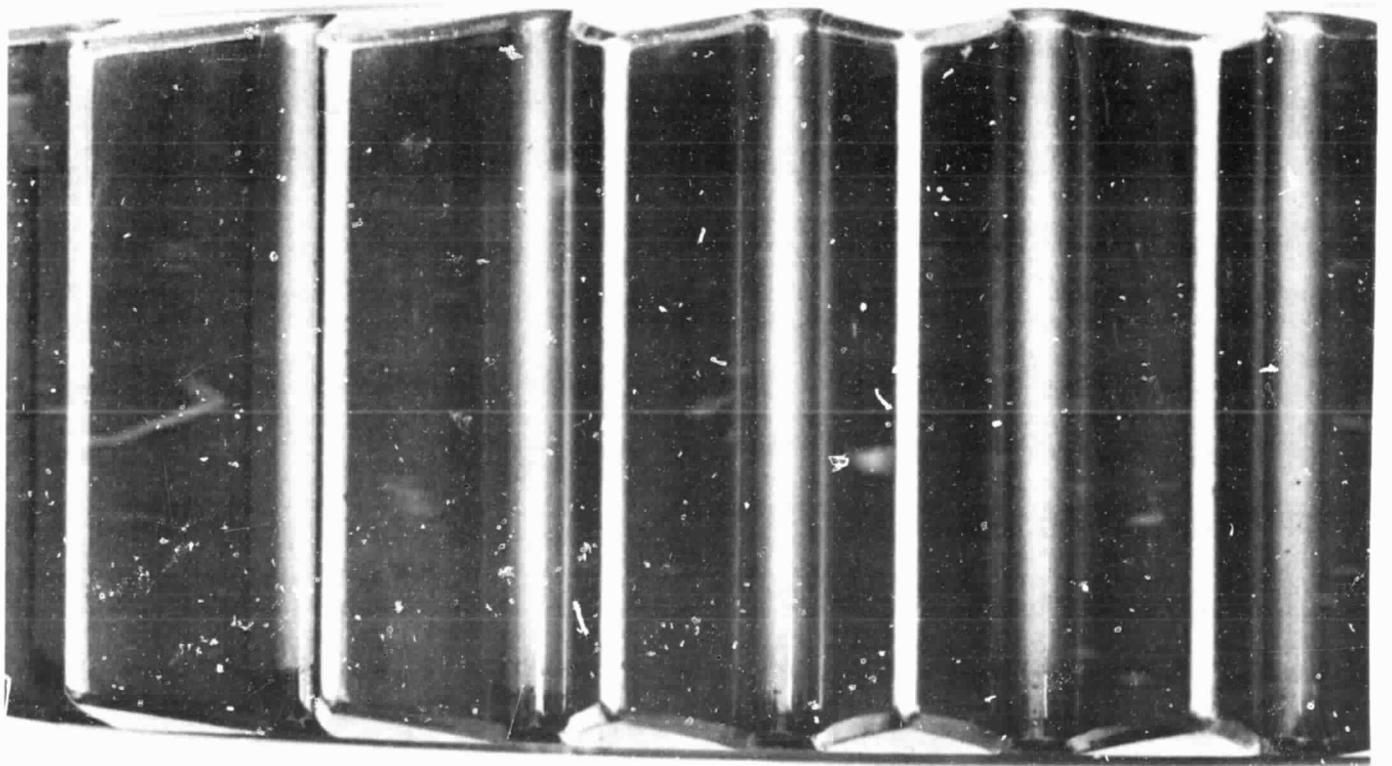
FIRST STAGE PLANET TOOTH SURFACES - SUN GEAR CONTACT
